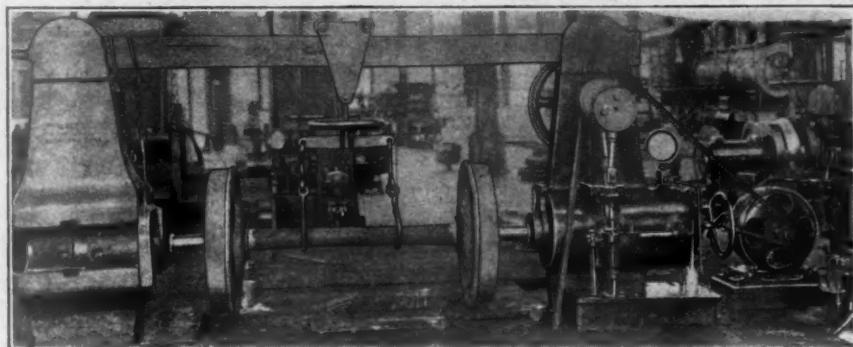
MOTOR DRIVE APPLIED TO NILES WHEEL PRESS.
